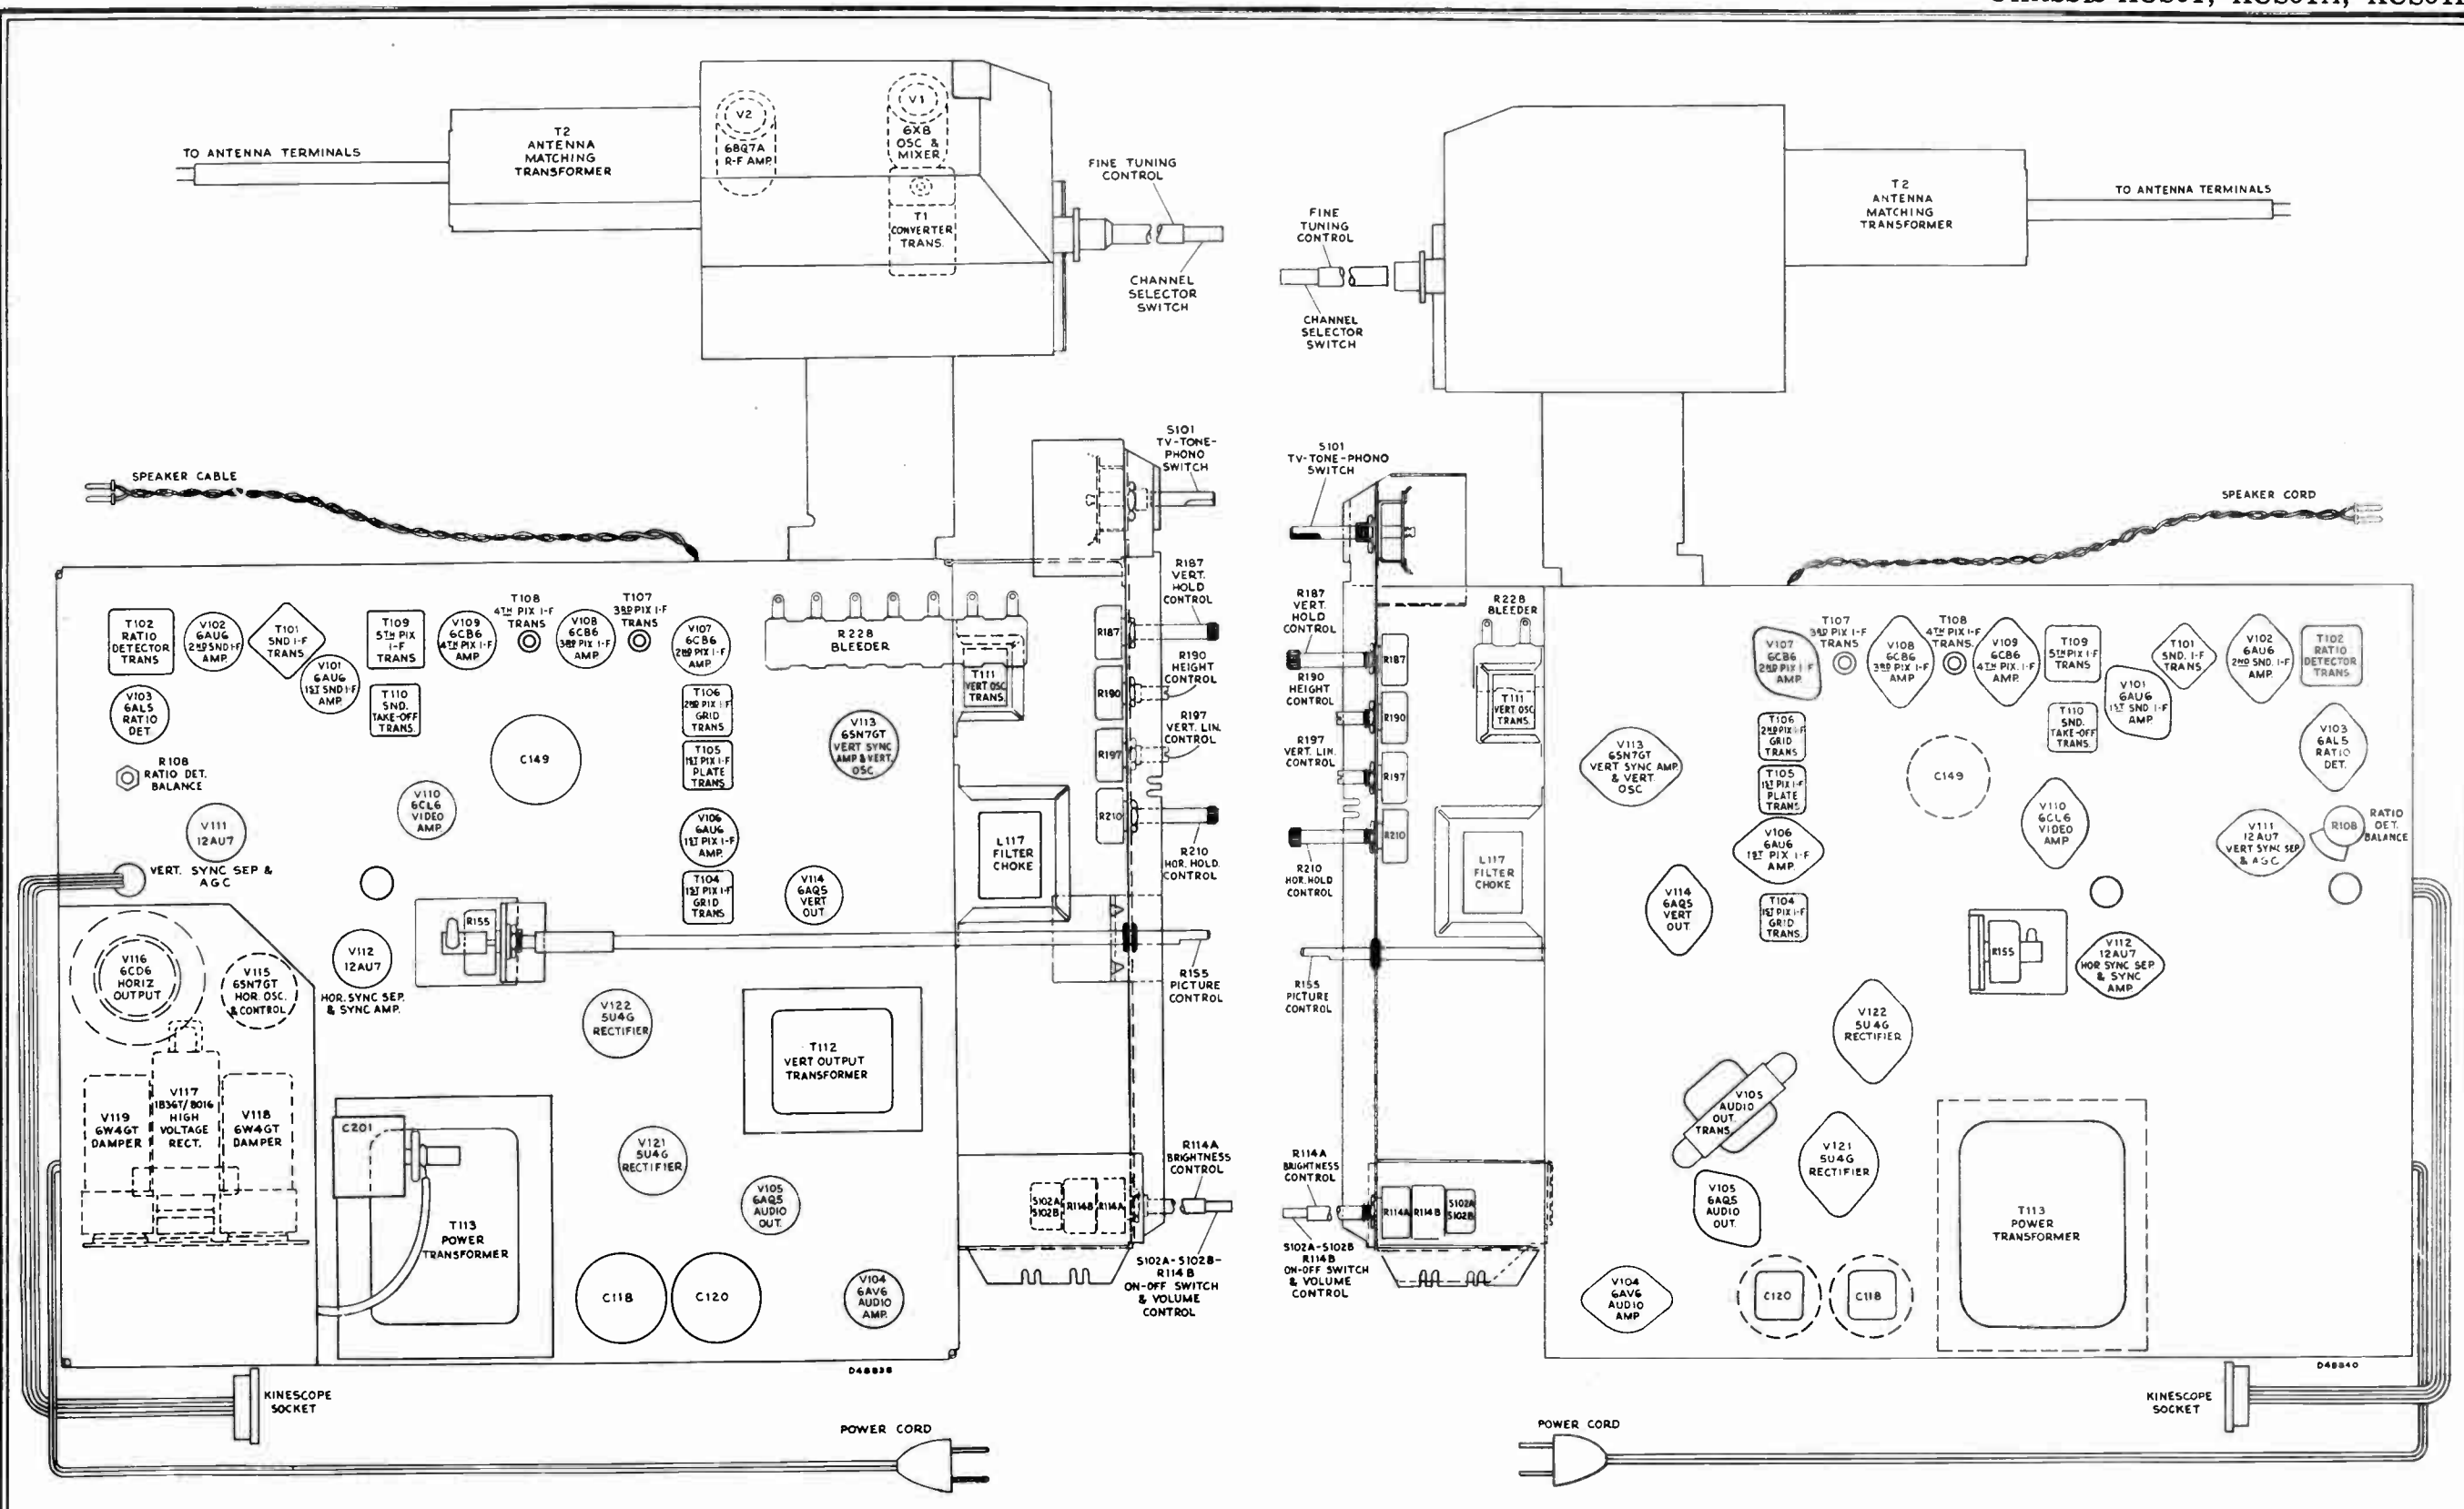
Chassis Top View (shown with KRK11B Tuner)
